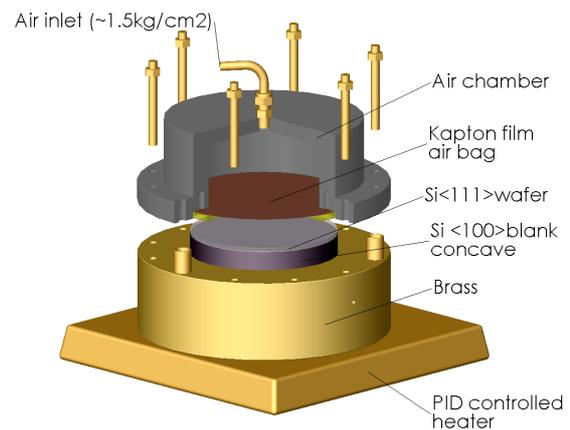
The uniform pressing tool that exerts constant pneumatic force during curing.
